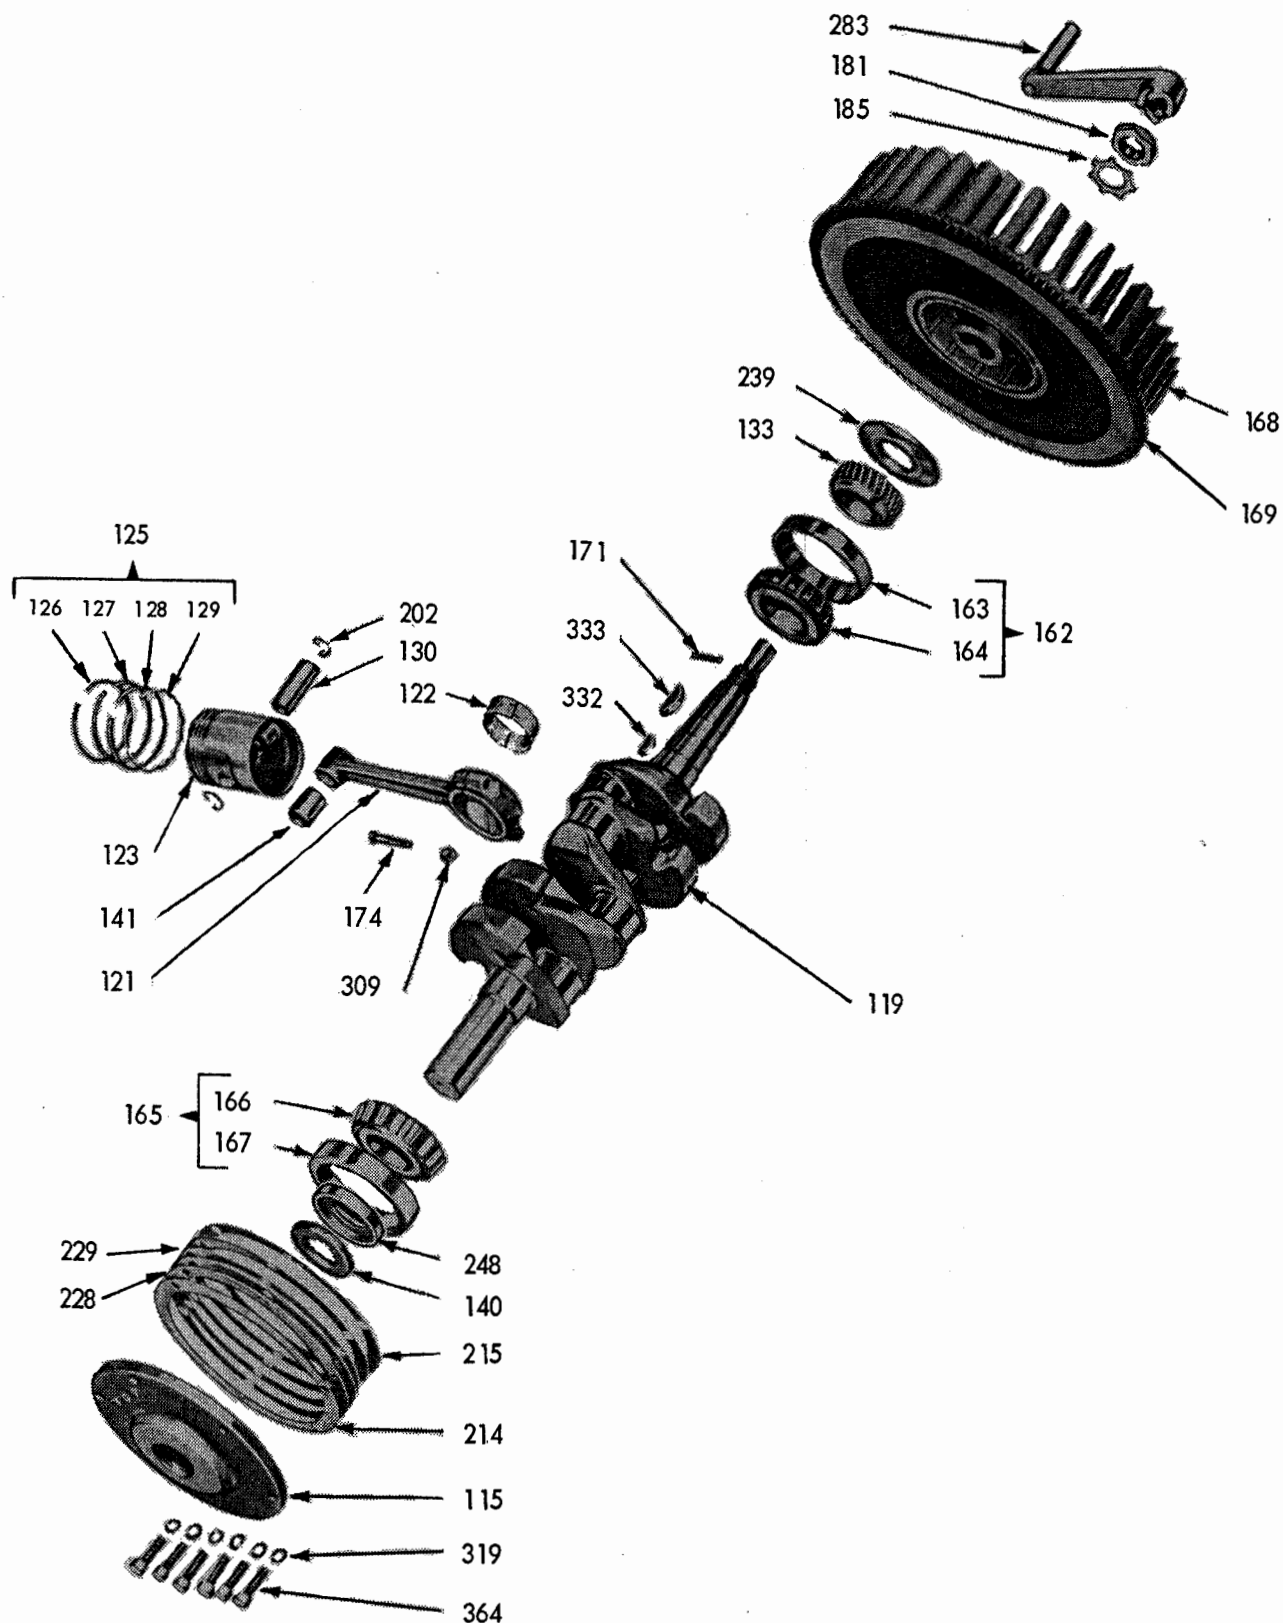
, CRANKSHAFT, PISTON AND CONNECTING ROD GROUP
